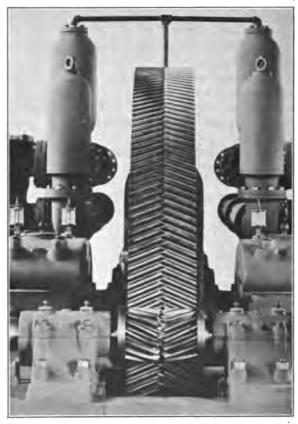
SHOWING TYPE OF HERRINGBONE GEAR REFERRED TO IN THIS PAPER.
